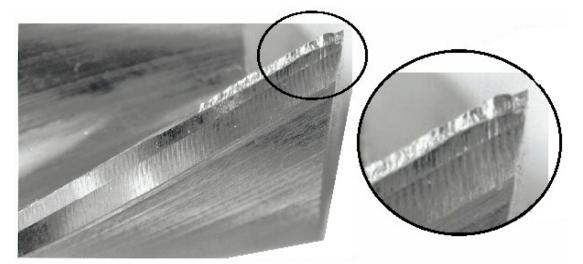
Monolithic Cutting Tool with Flank Wear Highlighted.
